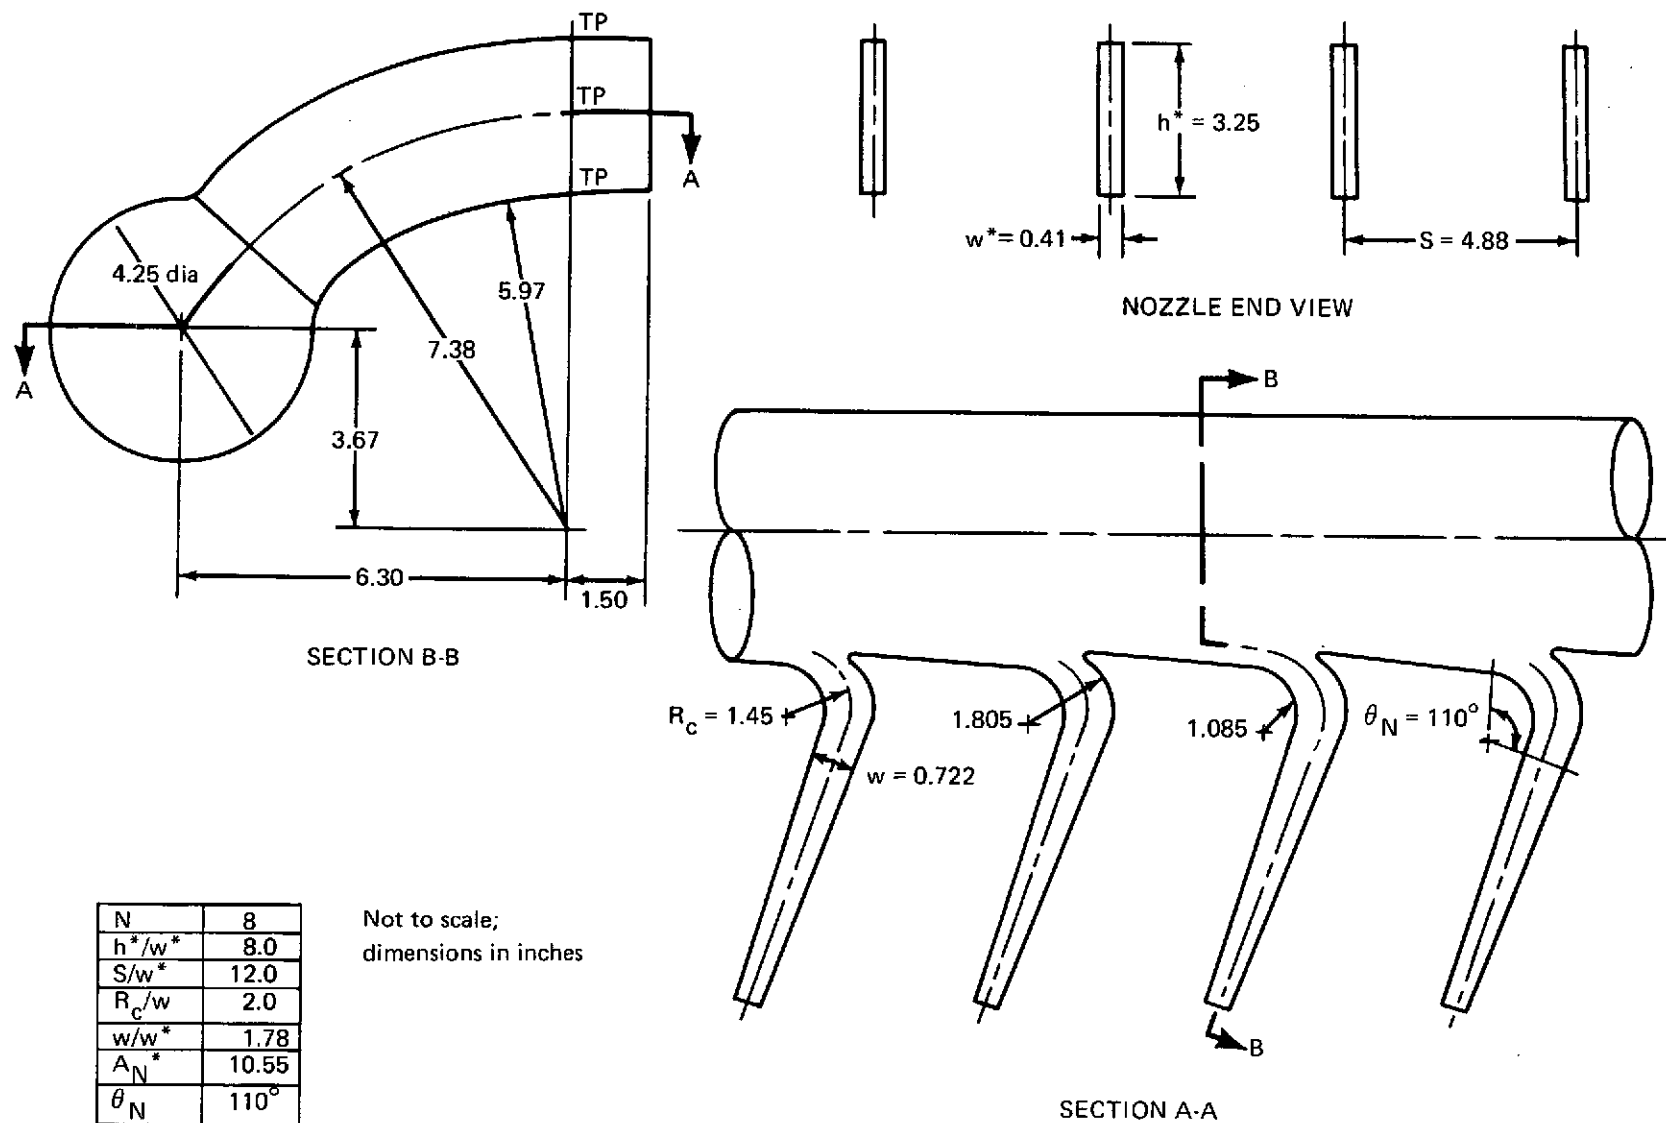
WING-DUCT NOZZLE ASSEMBLY DNA-5 DESIGN DETAILS
